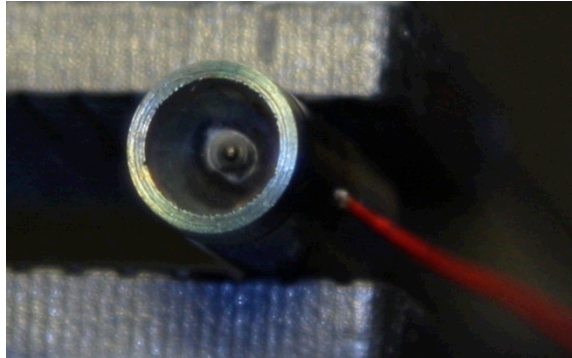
Early thermocouple plug welded using a TIG welder with foot pedal control. The large heat effected zone and overheated weld area is evident by the blue coloring and dull weld finish.
